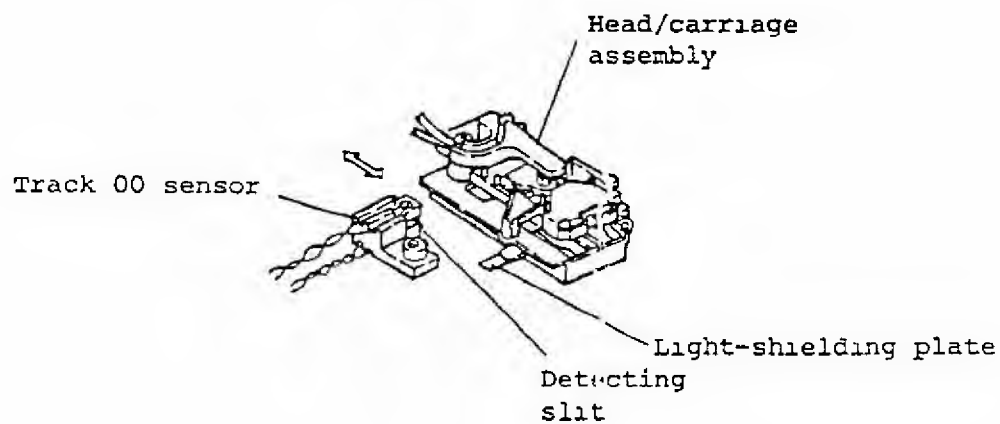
Track 00 Sensor and Head/Carriage Assembly
